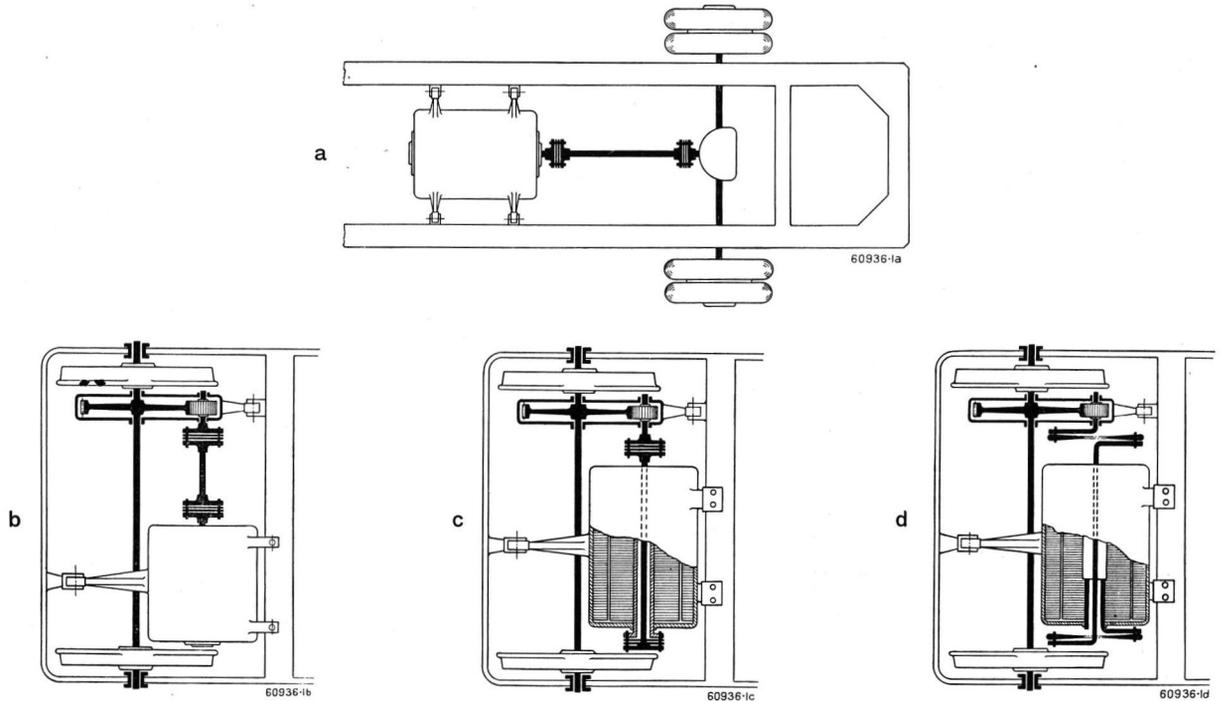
Development of disc drive from cardan drive with Hardy coupling.
